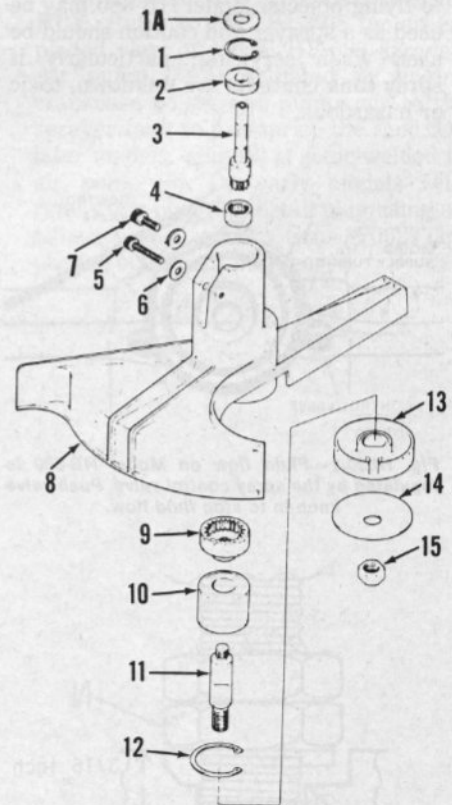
Exploded view of brushcutter head which is standard on Model ST-210 and optional on Model ST-200.
